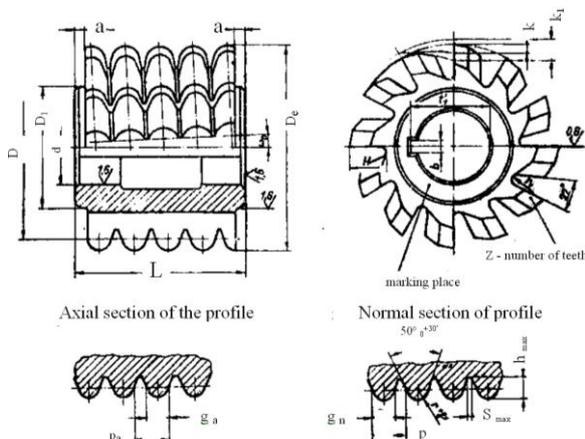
Shape and dimensions of the sprocket hob[6]
